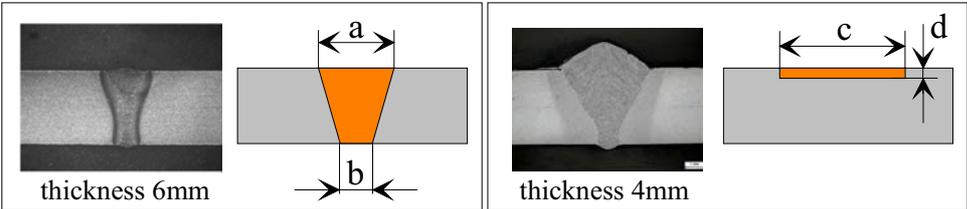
Principles of laser and GMA welding energy implementation
